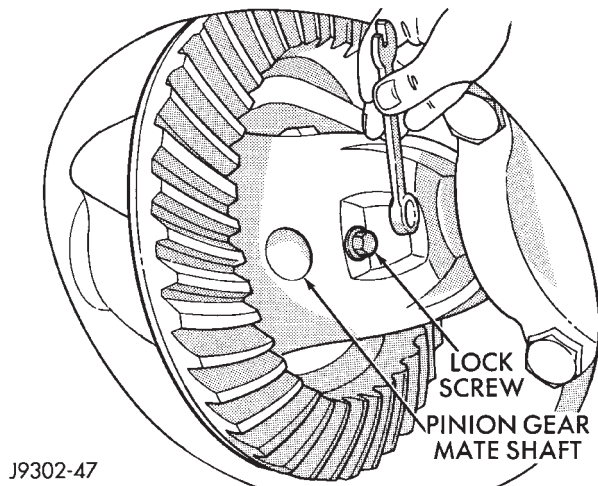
Pinion Gear Mate Shaft Lock Screw
